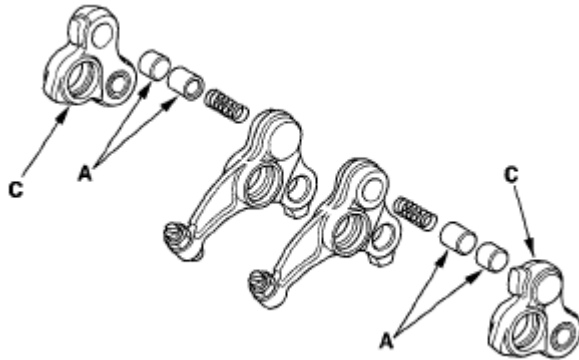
Identifying Rocker Arm Pistons - Exhaust
